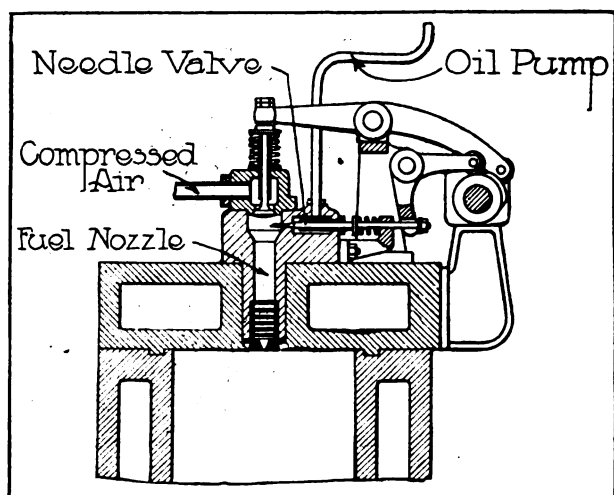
Suggested Method of Fuel Feed for Diesel Engines Which Might Be Adapted to Automobiles.
